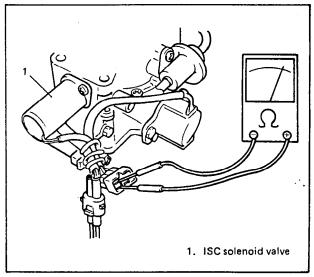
E-108 Checking Resistance of ISC Solenoid Valve
